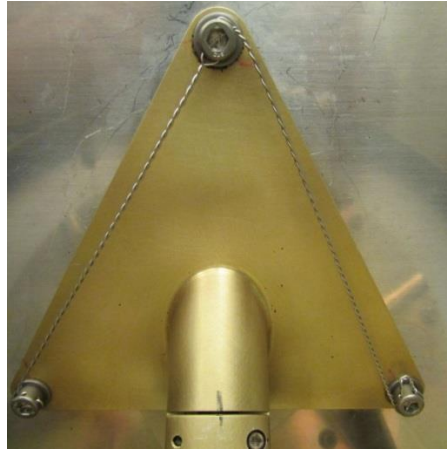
Wire Locked Fasteners on Scanning Flat Reflector
